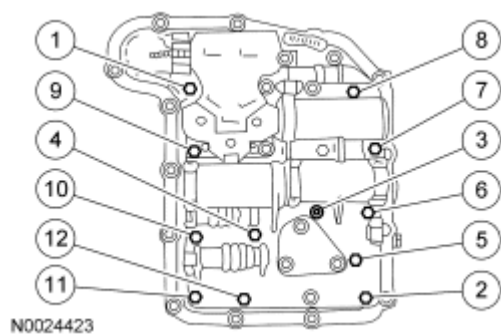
Main Control Valve Body Mounting Bolt Tightening Sequence
